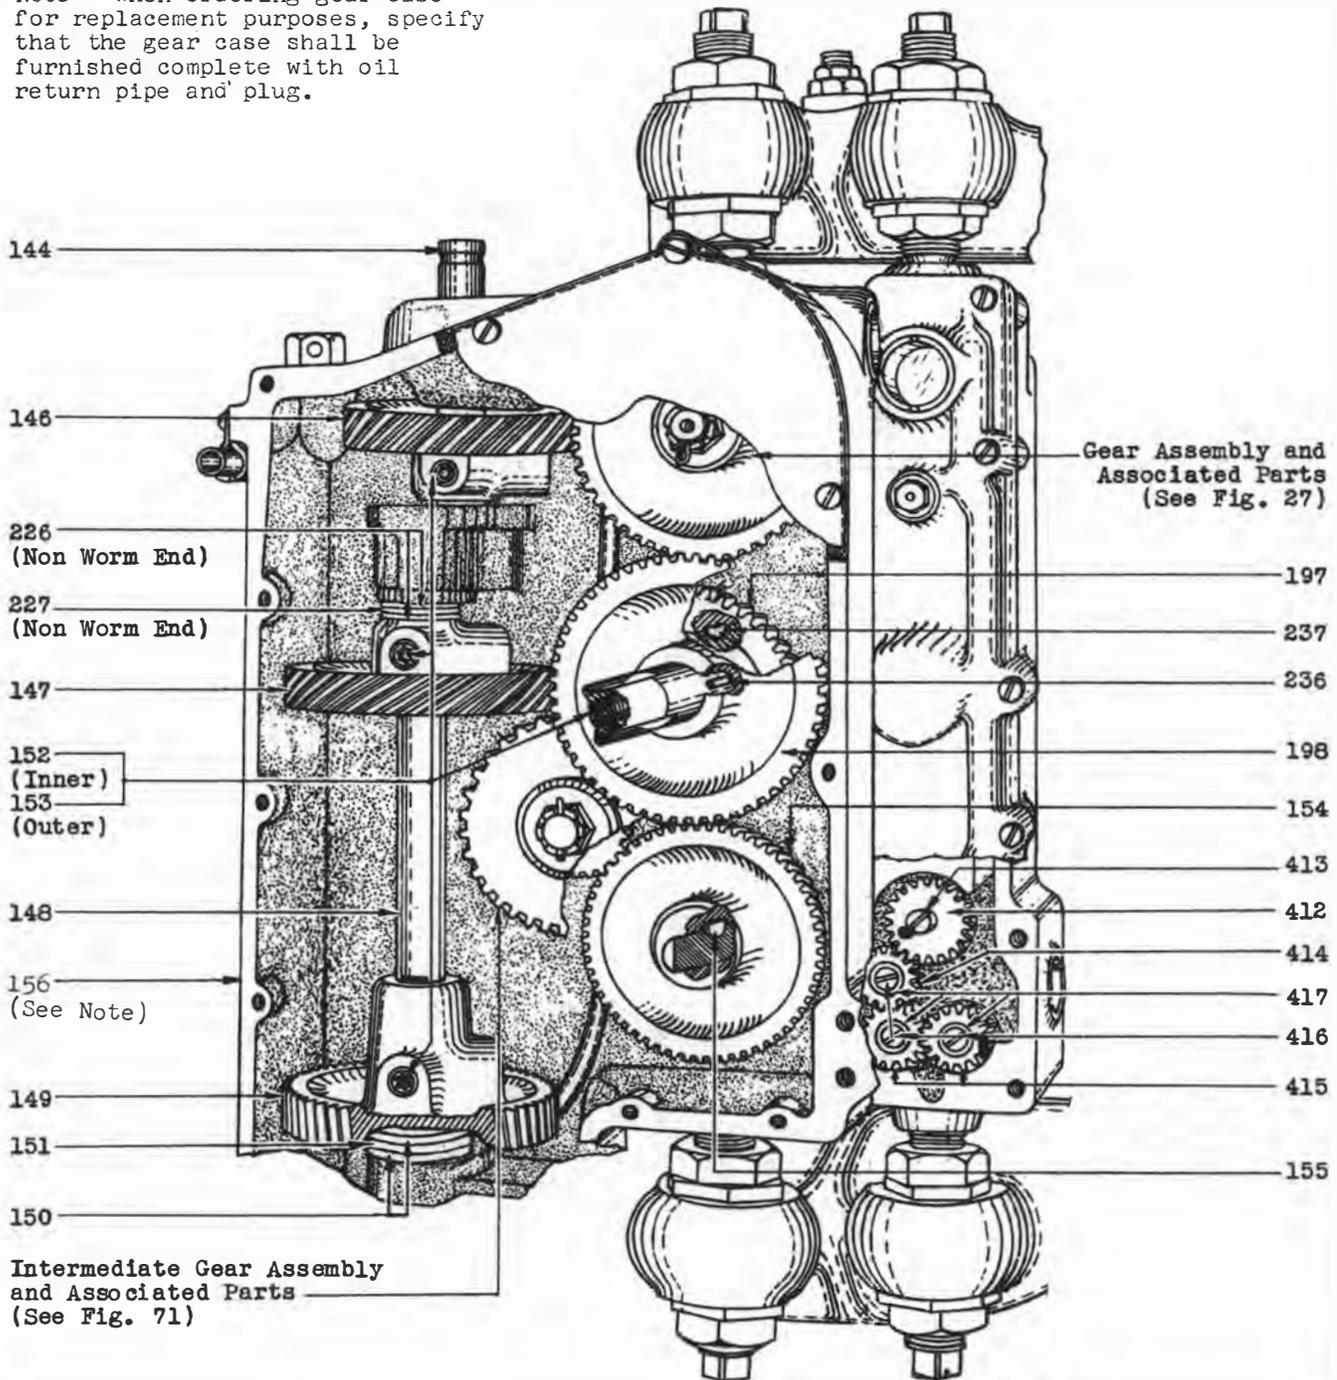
Internal Parts - Gear Case and Bearing Box
